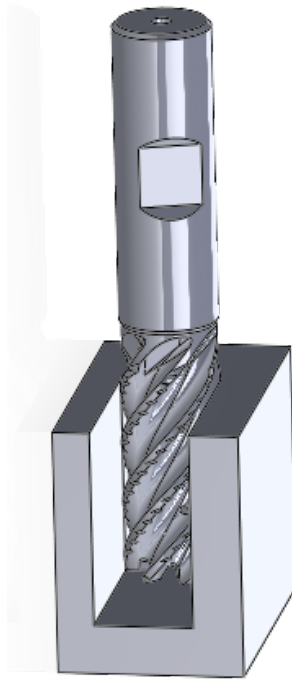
CAD geometries used for a full slot milling application. A CoroMill Plura solid carbide end mill by Sandvik, and the workpiece with a machining slot, cut in at a axial depth of 32mm.
